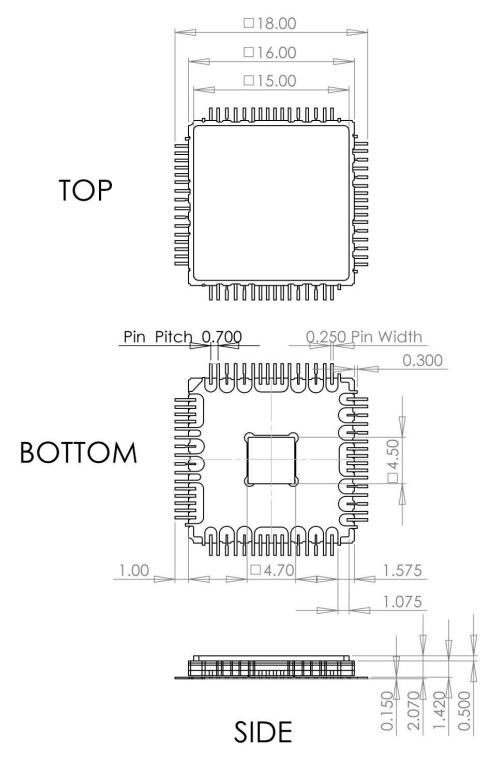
CQFP 64-Pin Package Drawing (All Dimensions in mm)
